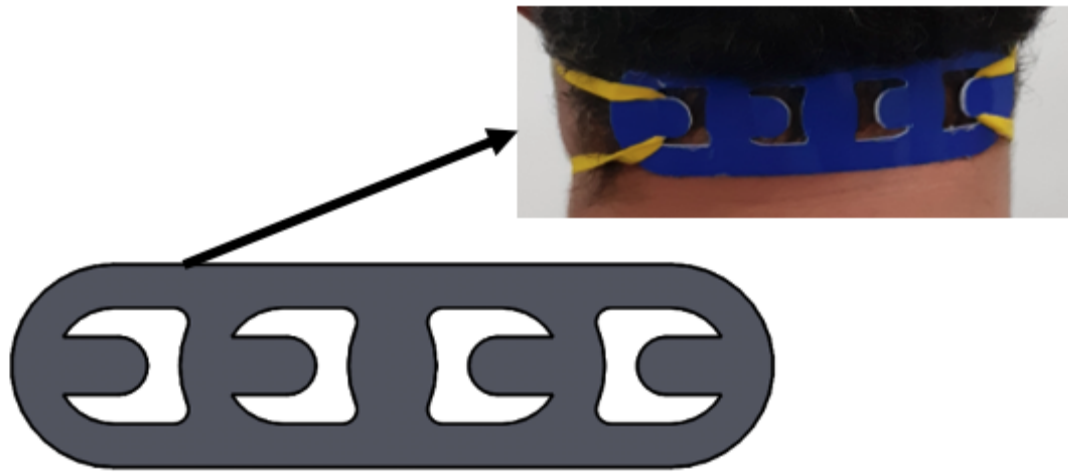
Adjustable scale 3D design and prototype.
